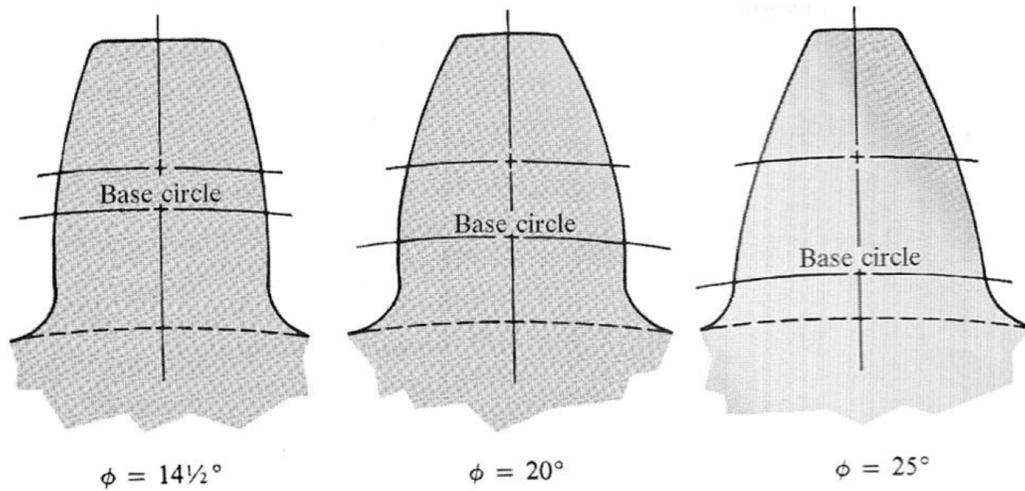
Involute Tooth Form for varying Pressure angles [34]
